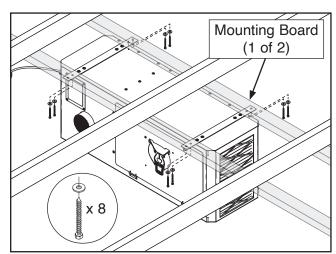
Securing machine to mounting boards (mounting boards greyed out for clarity).
